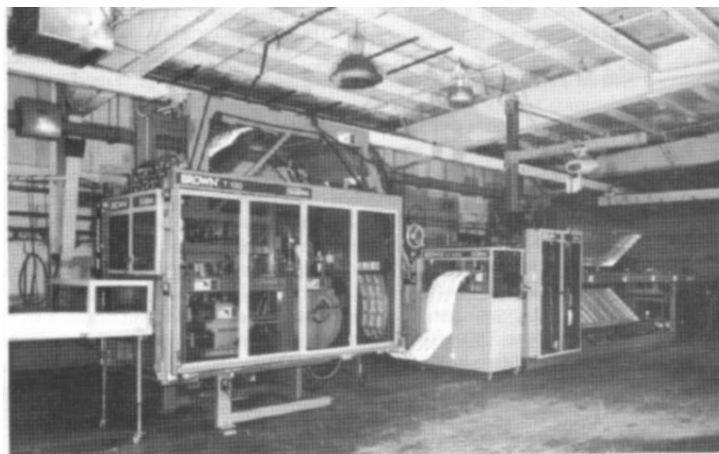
Continuous thermoforming machine (Courtesy: Brown Machine)
